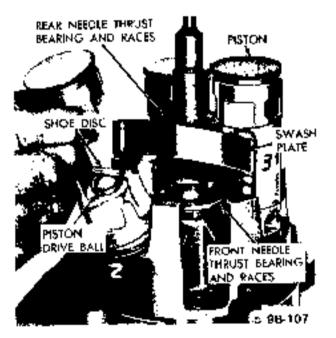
B-134 Disassembly of Cylinder Assembly -Service Pistons Shown
